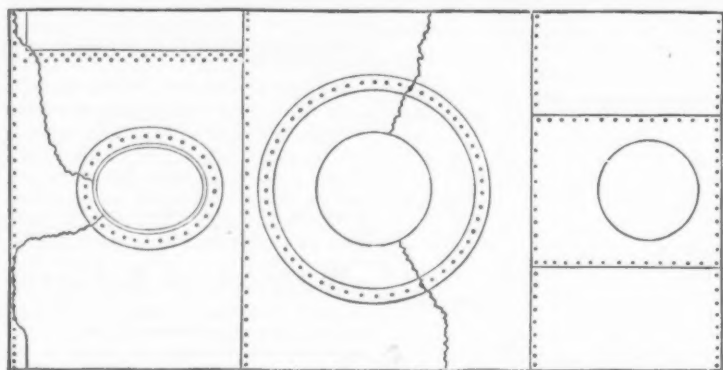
Exploded Tug Boat Boiler.—Plan Showing Steam Dome, Manhole and the Location of the Cracks.
